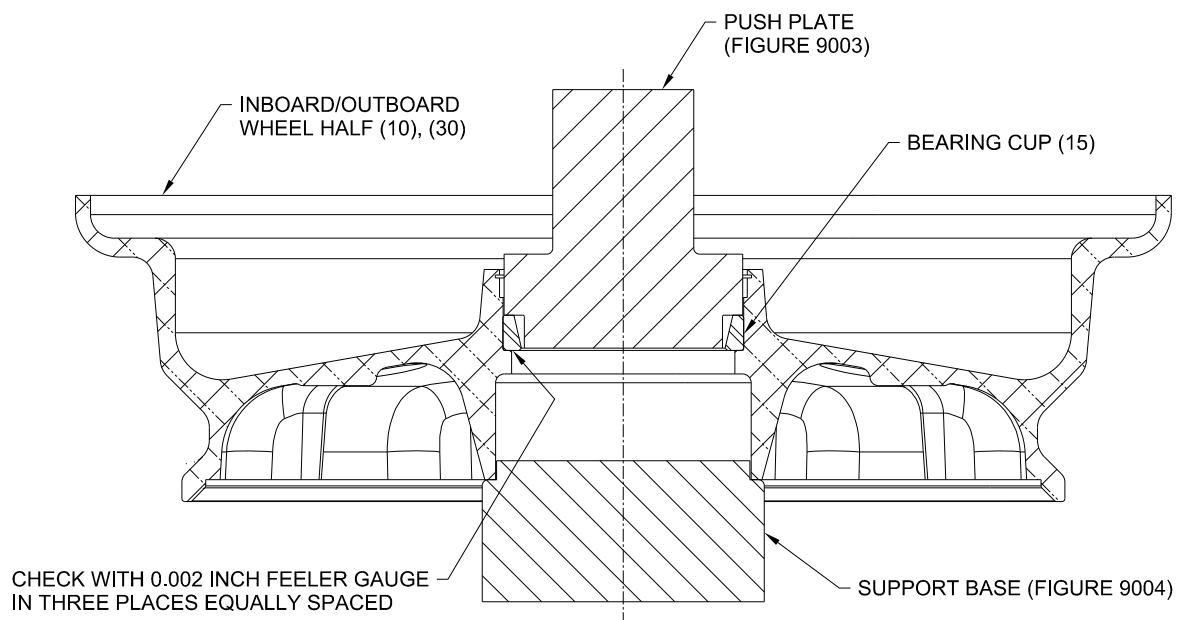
Install the bearing cup – inboard/outboard wheel half (10), (30)
